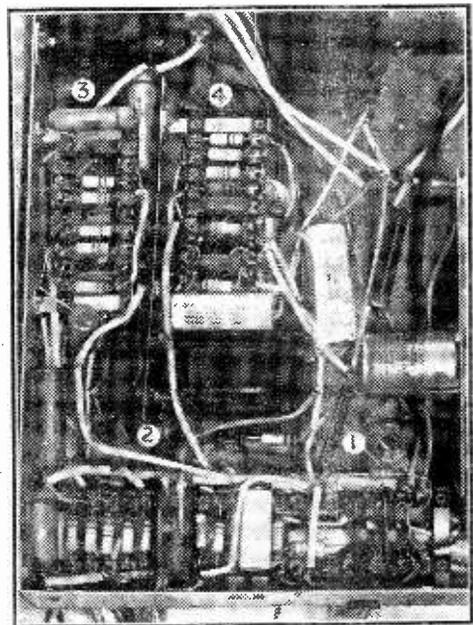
A corner of the chassis showing the tag boards—numbered 1 to 4. Wiring for these boards will be found on the facing page.
